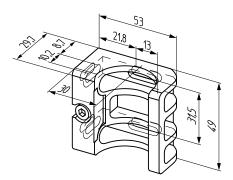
Dimensional drawing of the FlexFix bracket (2066614)
